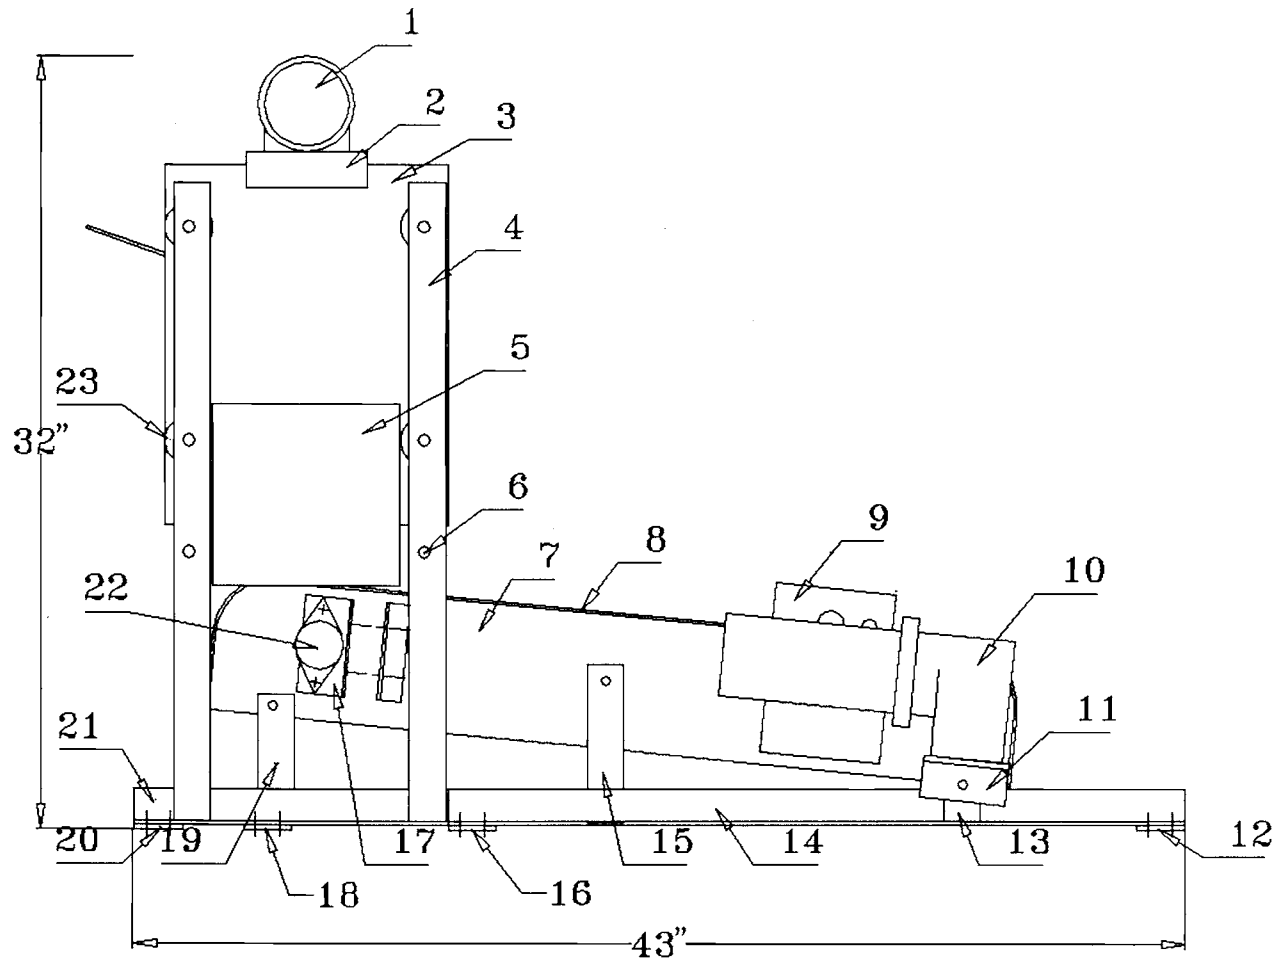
Side View of Vibrating Hopper-Conveyor Apparatus
